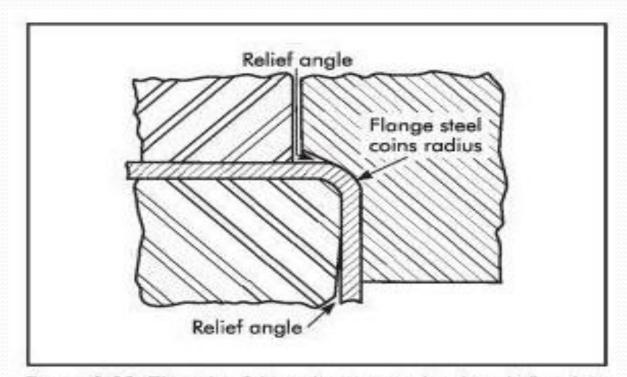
The side of the radius is coined and a relief angle is provided in the lower-die steel in this improved springback control method.
